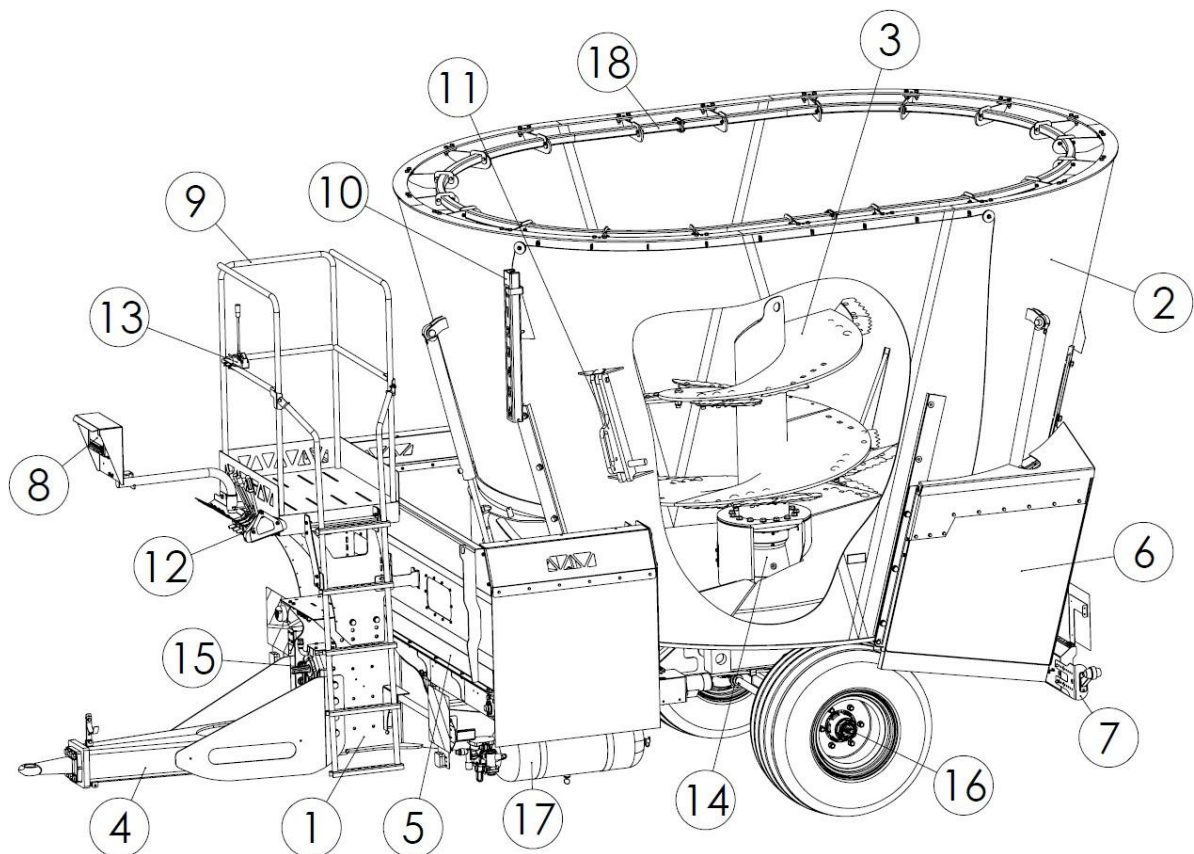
General design of the BEL-MIX T659/2 feeder wagon: 1 - frame, 2 - tank, 3 - screw, 4 - drawbar, 5 - front transverse conveyor, 6 - discharge, 7 - lights, 8 - balance, 9 - platform, 10 - opening indicator, 11 - counterblade, 12 - feeder wagon control levers, 13 - hydraulic counterblade control lever, 14 - planetary gear, 15 - two-speed gear, 16 - axle, 17 - air tank
